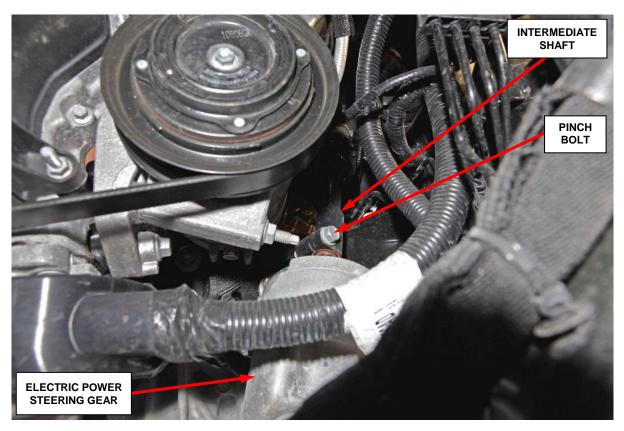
EPS Gear Steering Column Intermediate Shaft Pinch Bolt
